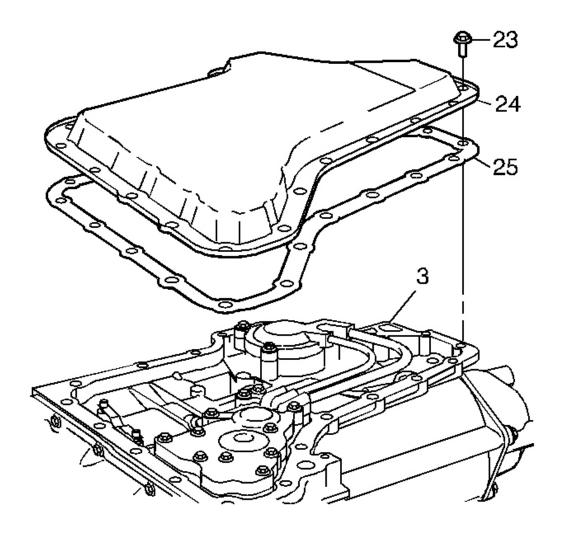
Locating Oil Pan & Gasket Courtesy of GENERAL MOTORS CORP.
